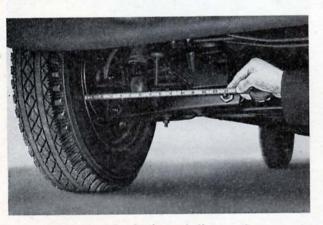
Checking the horizontal distance between the wheel rim and the suspension lower arm lubrication nipple
